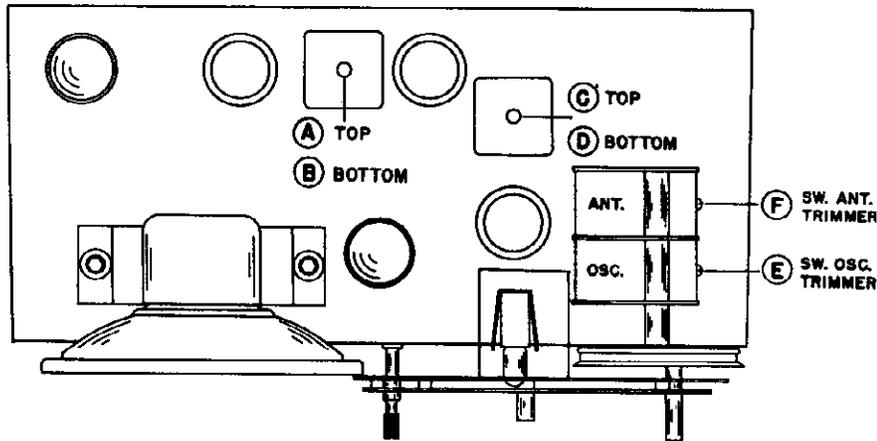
Top View of Chassis Showing Location of Alignment Adjustments
